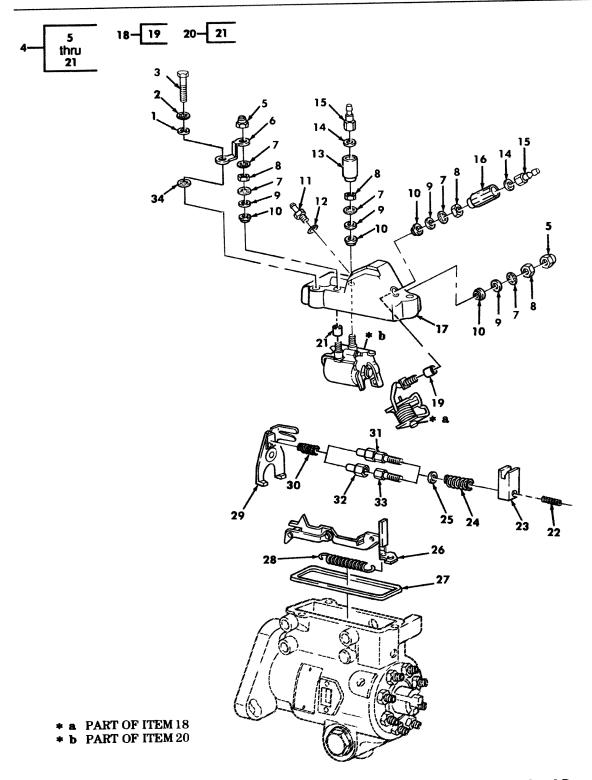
Fuel Injection Pump Cover Assembly, Governor Linkage, and Related Parts.
